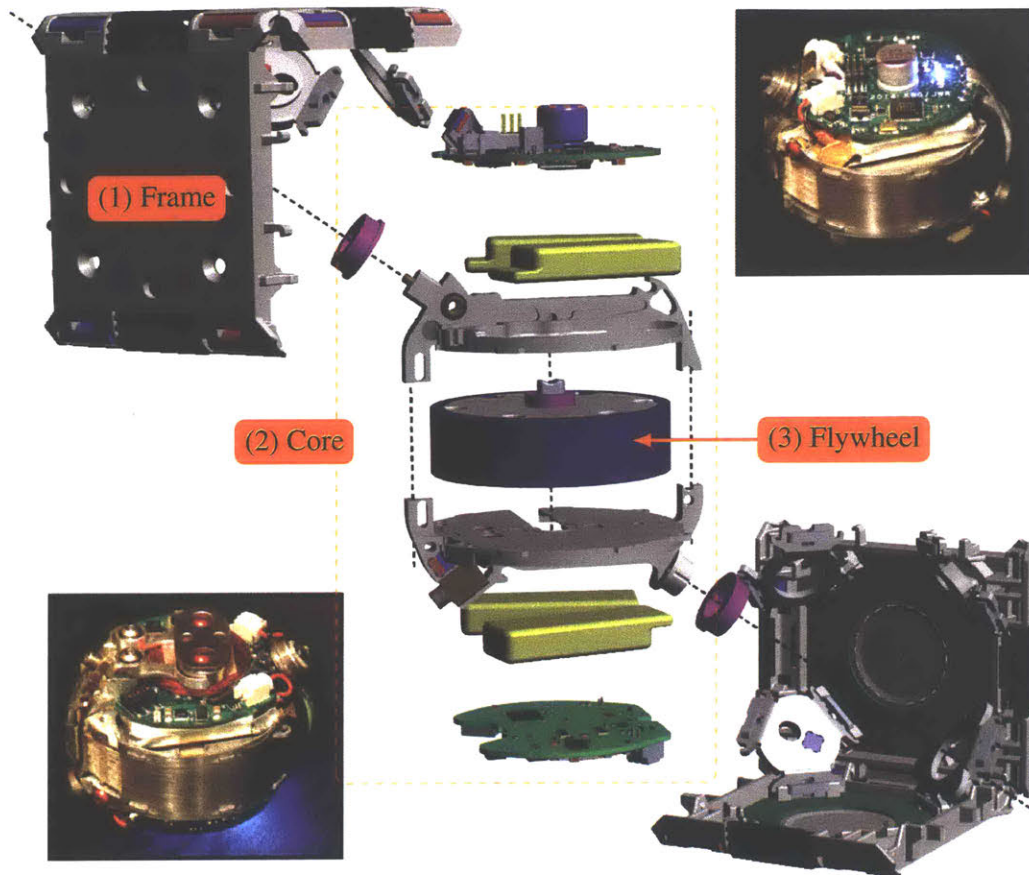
Each 3D M-Block has three primary assemblies which can be approximated as rigid bodies for dynamics calculations including (1) The frame, (2) the core assembly, and (3) the flywheel. The frame is built out of six injection molded frame panels (*gray*) which support the core assembly (*lighter gray, split in half*) along the frame's longest diagonal axis on two ball bearings (*pink*). The molded frame holds eight magnets colored red and blue to represent their magnetic polarities for providing face to face magnetic connection with neighbors. The central assembly holds batteries (*yellow*) and circuit boards (*green*) as well as the flywheel (*purple*). The flywheel is the most important component of the inertial actuator, but for clarity the brake assembly is not shown in the exploded-view, however it can be seen in the bottom-left inset picture. This actuator uses a linear motor to actuate a band brake to generate torques. The top-right inset picture shows the core robot assembly with the main PCB side showing.
